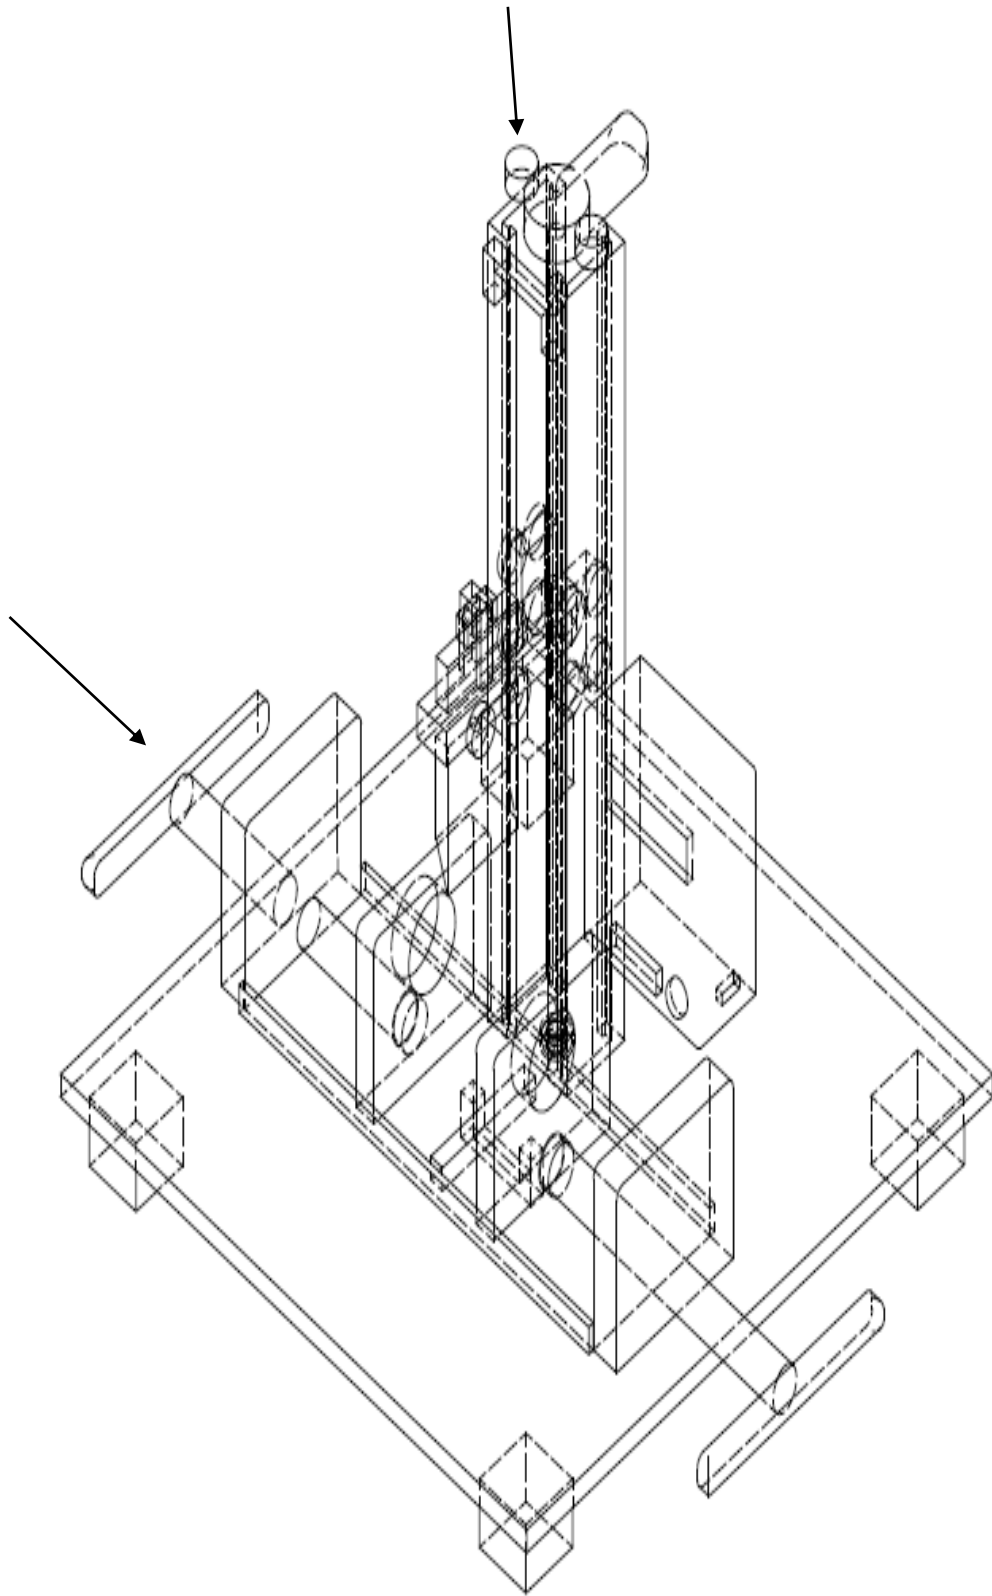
Sectional view of the automated cutter (Vertical section)
